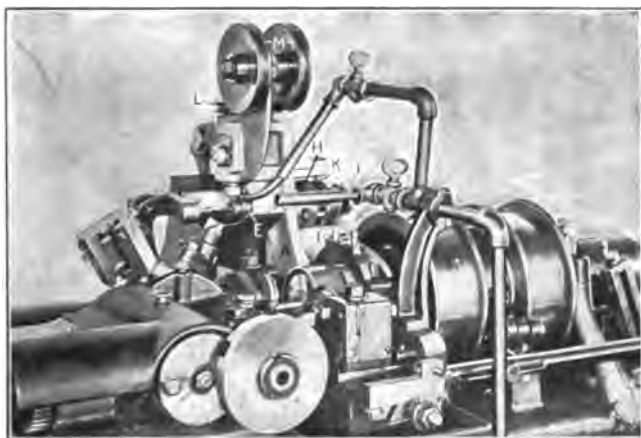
Rear View of the Index Drilling Attachment in Place on a No. 00 Brown & Sharpe Automatic Screw Machine
